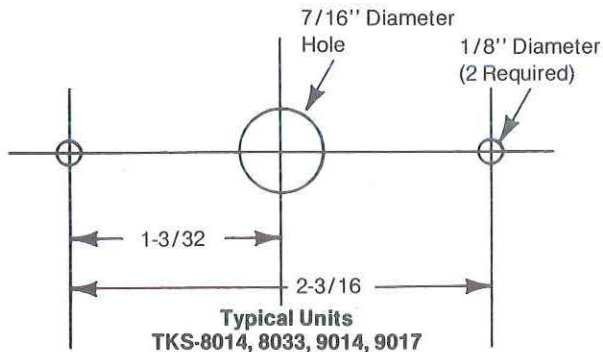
Full Scale Template for Drilling Rod/Tube Unit Holes
